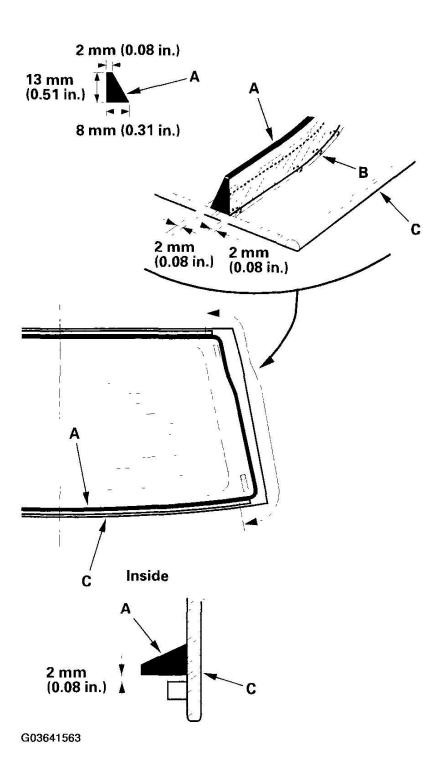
Running Bead Of Adhesive On Glass Primer Trace Courtesy of AMERICAN HONDA MOTOR CO., INC.
